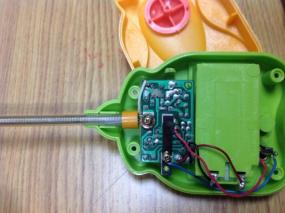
Additional, outside wires are soldered to the receptors of the monojack.
